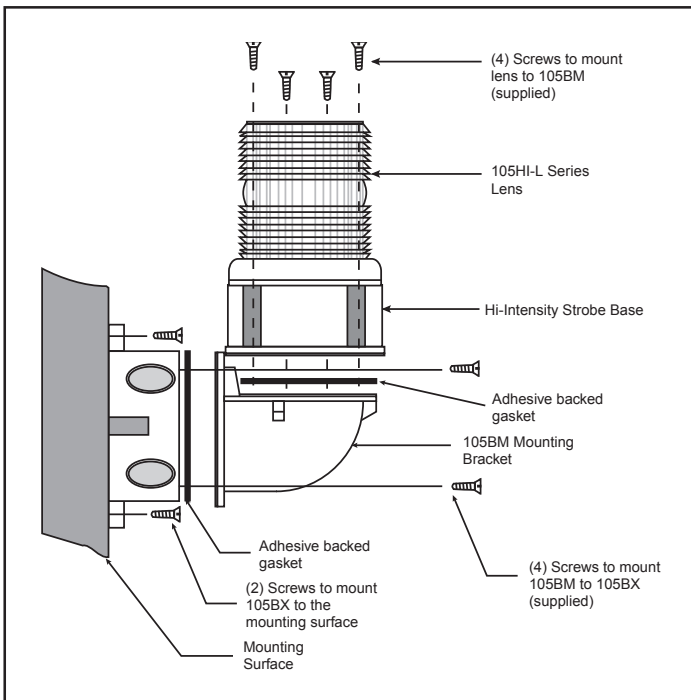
Mounting Cat. No. 105BM Mounting Bracket
